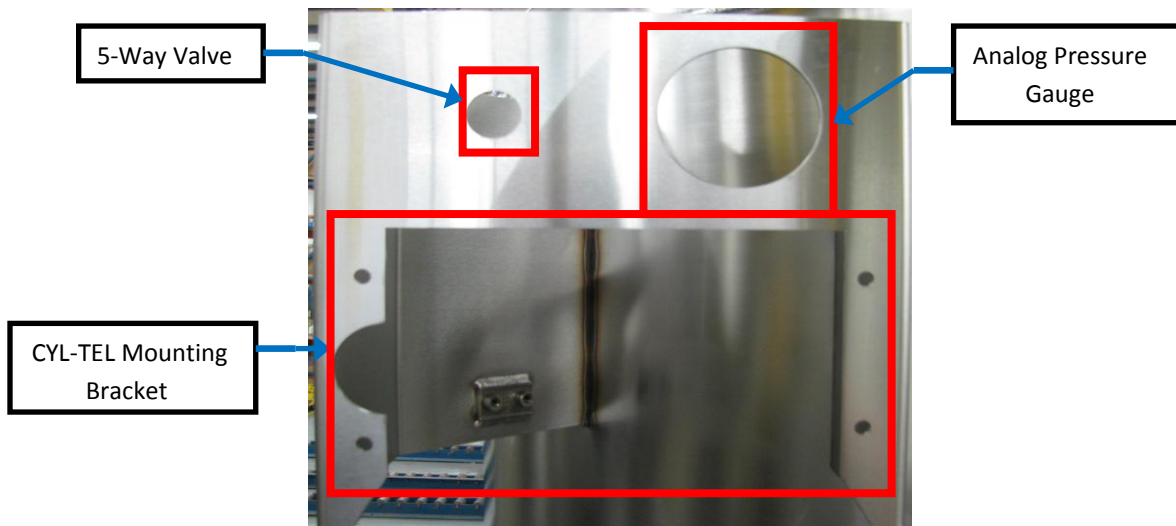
Tank fixture for CYL-TEL bracket, analog pressure gauge, and 5-way valve.
